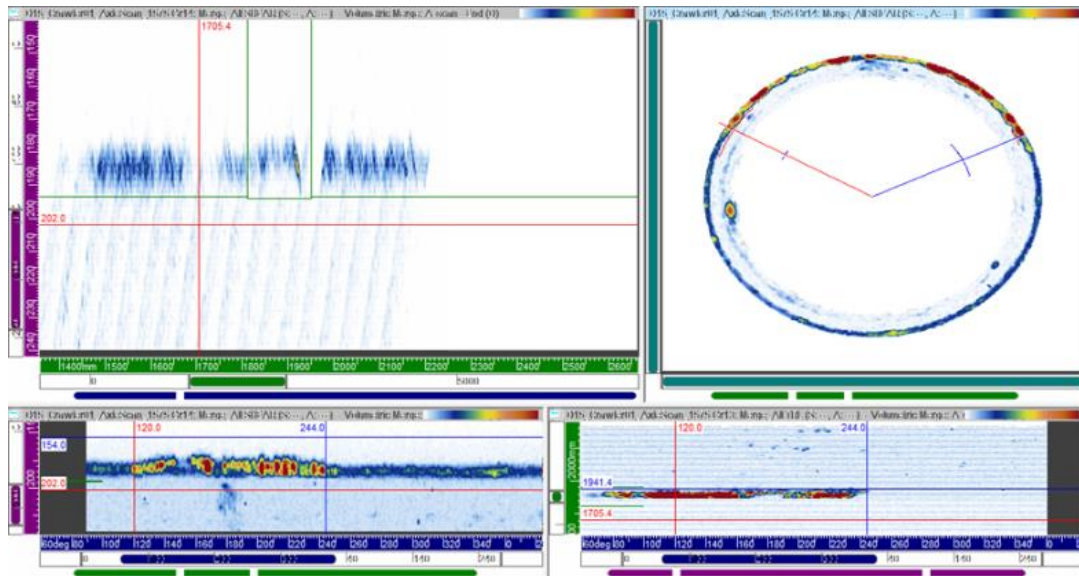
Results of Bucket Wheel Shaft Inspection by Phased Array
